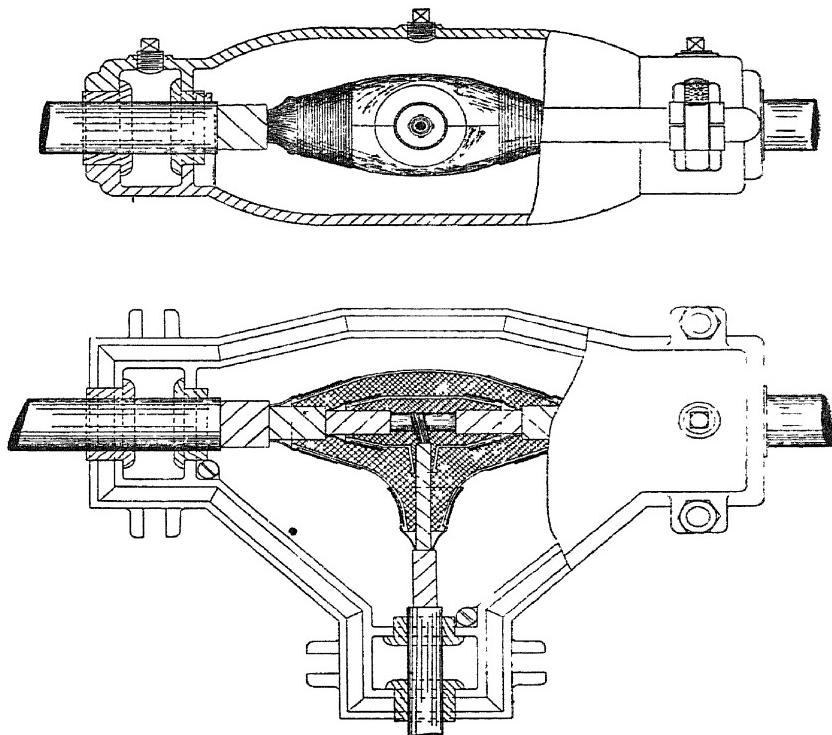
SHELL FITTINGS FOR CONCENTRIC JOINT.
